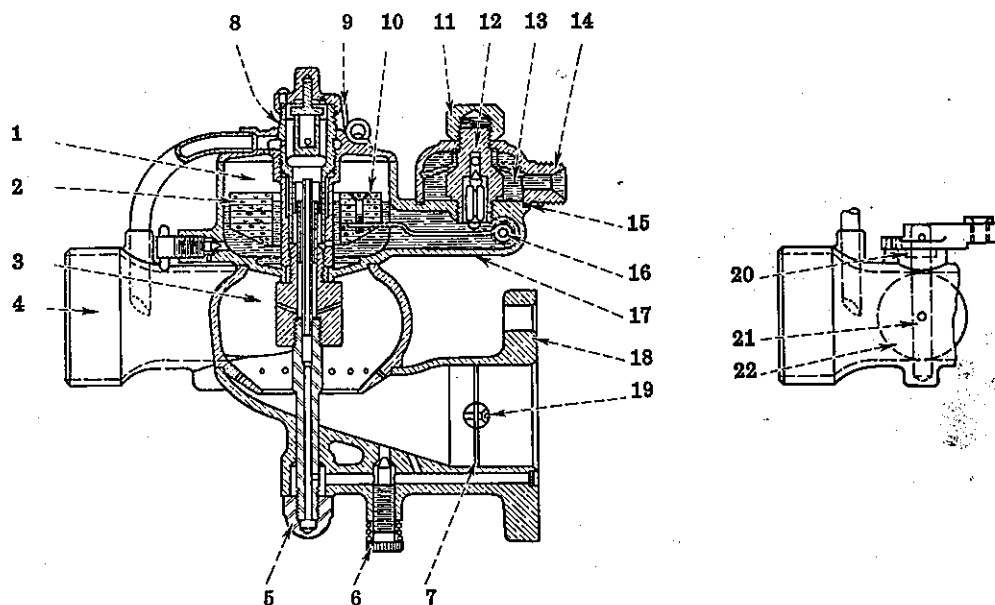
Illustration No. 64—Carburetor, Model "R," 1½" (17945D) (sectional view).
